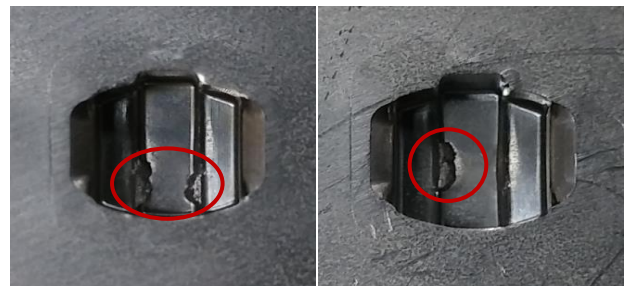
Damaged area of pocket in the fine blanking trial mold
